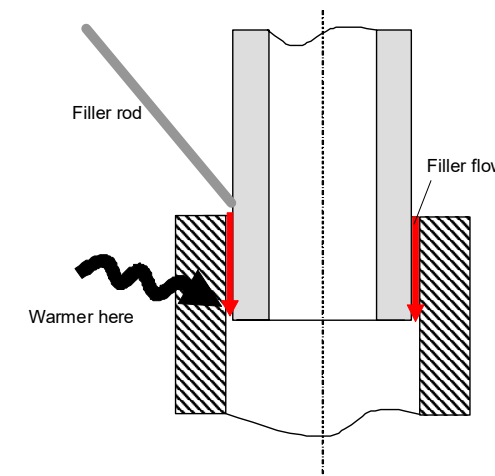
Heating configuration using hand-held filler rod with flame/torch brazing. The filler flow pushes flux residues inside the tube which might make it more difficult to clean.
